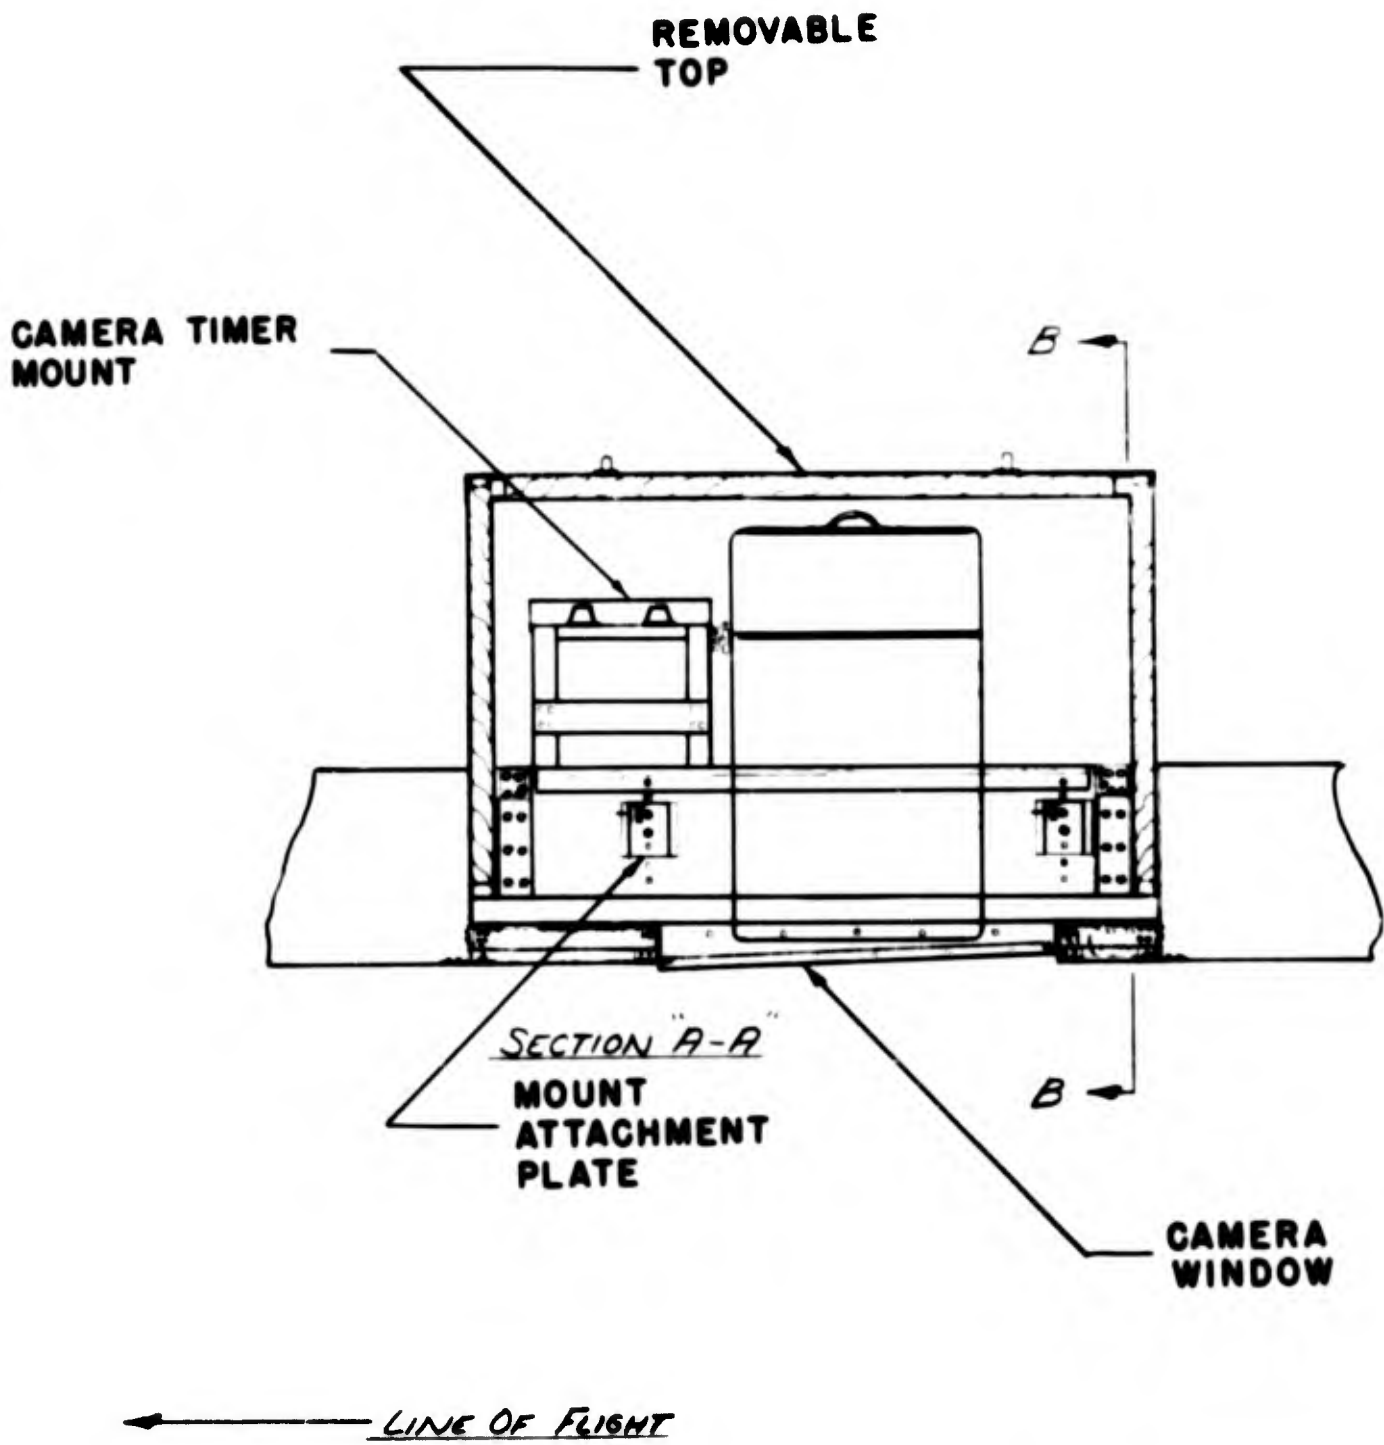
CAMERA CHAMBER CONSTRUCTION (SIDE VIEW)
